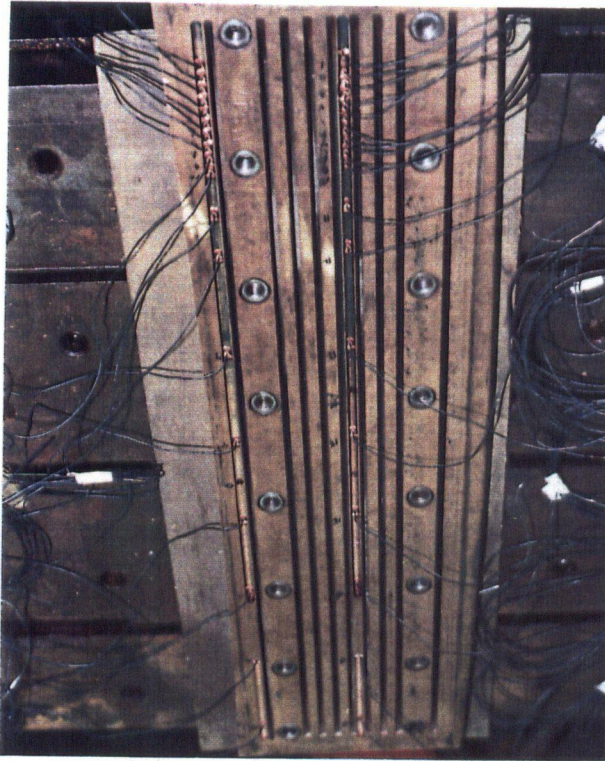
Photograph of an instrumented narrow face copper plate.
